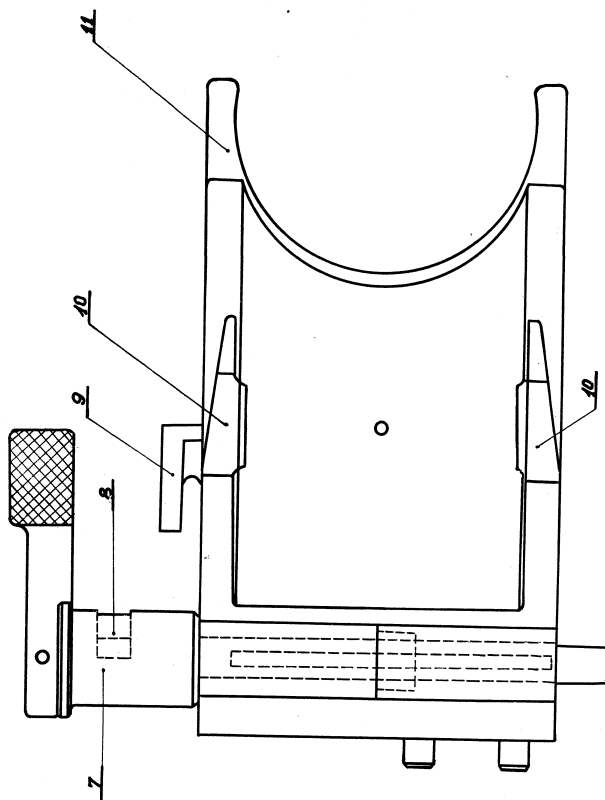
BREECHBLOCK ASSEMBLY (WITHOUT THE FRONT PLATE)
